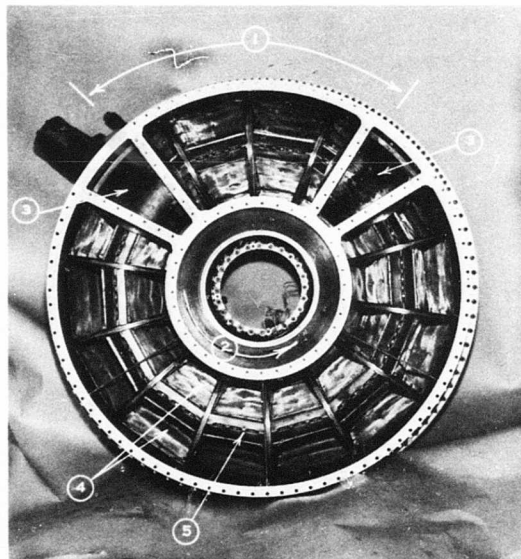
Hot Side (Rear) of Rotary Regenerator: (1) High-Pressure Sector, (2) Direction of Rotation, (3) Sealing Tunnels, (4) Matrix Packages, (5) End Seal.
